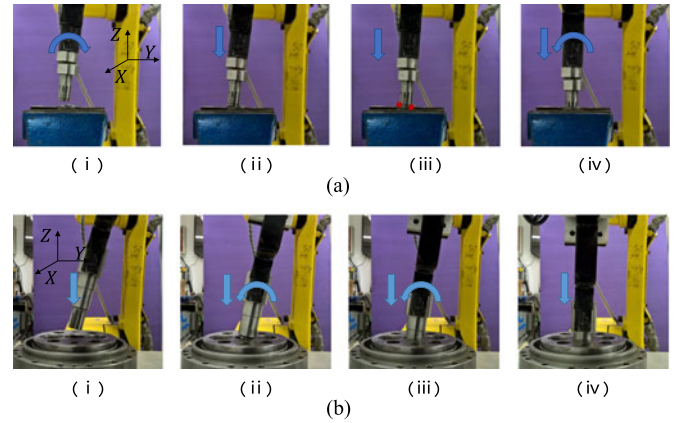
Whole process of (a) crankshaft-bearing assembly and (b) input shaft case assembly.
